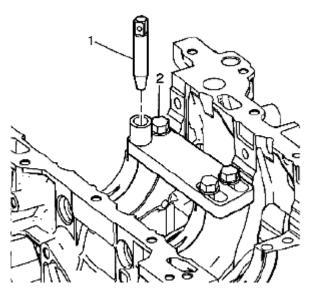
Identifying Fixture Plate, Bushing And Bolts Courtesy of SUZUKI OF AMERICA CORP.
